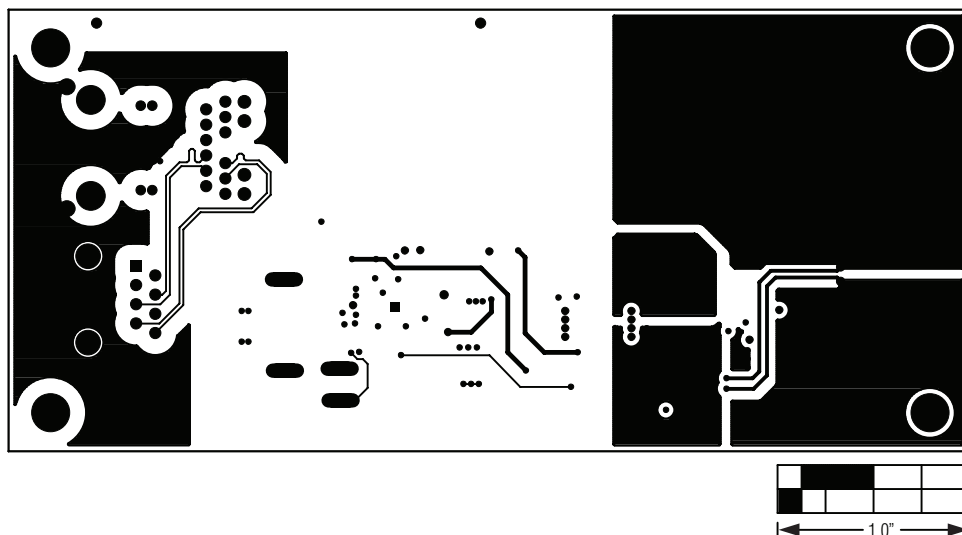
MAX5974C EV Kit PCB Layout—Signal Layer 3
